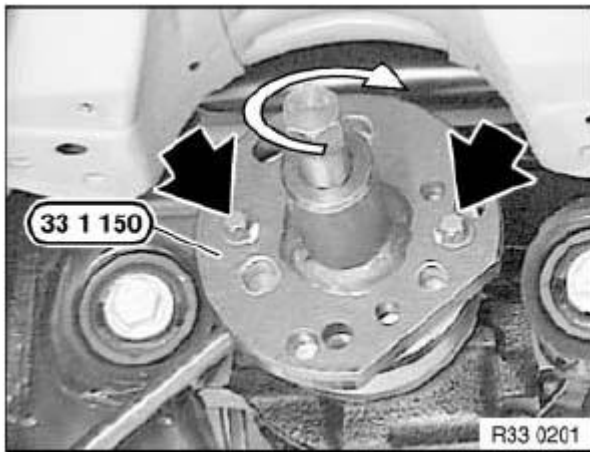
Identifying Special Tool (33 1 150) On Drive Flange
